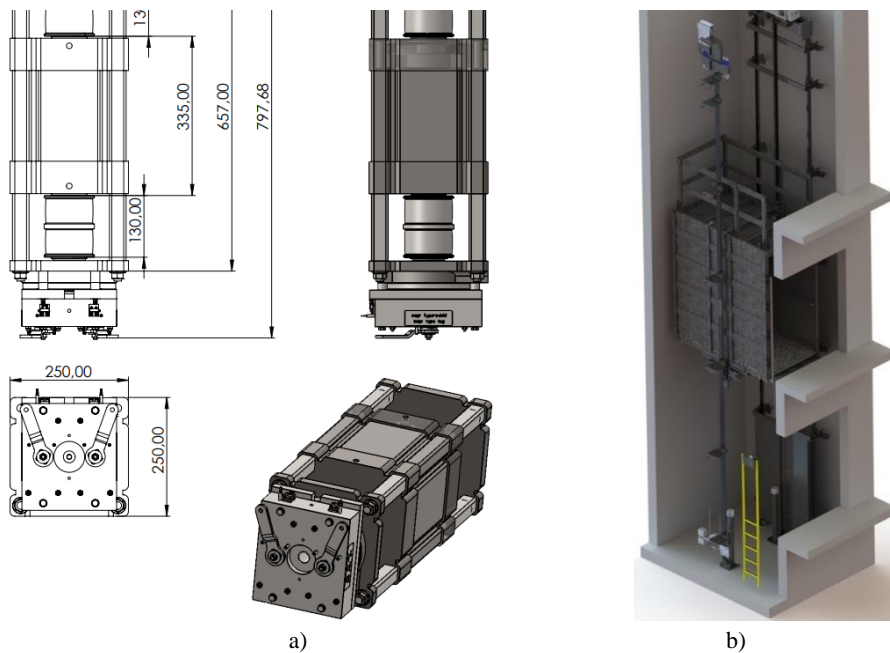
a) General dimensioning of the motor, b) Hoistway assembly
